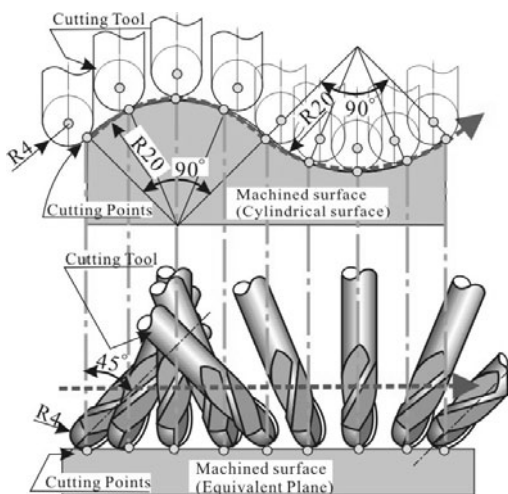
Equivalent machining for tool posture and machining condition. between 3-axis and 5-axis control
